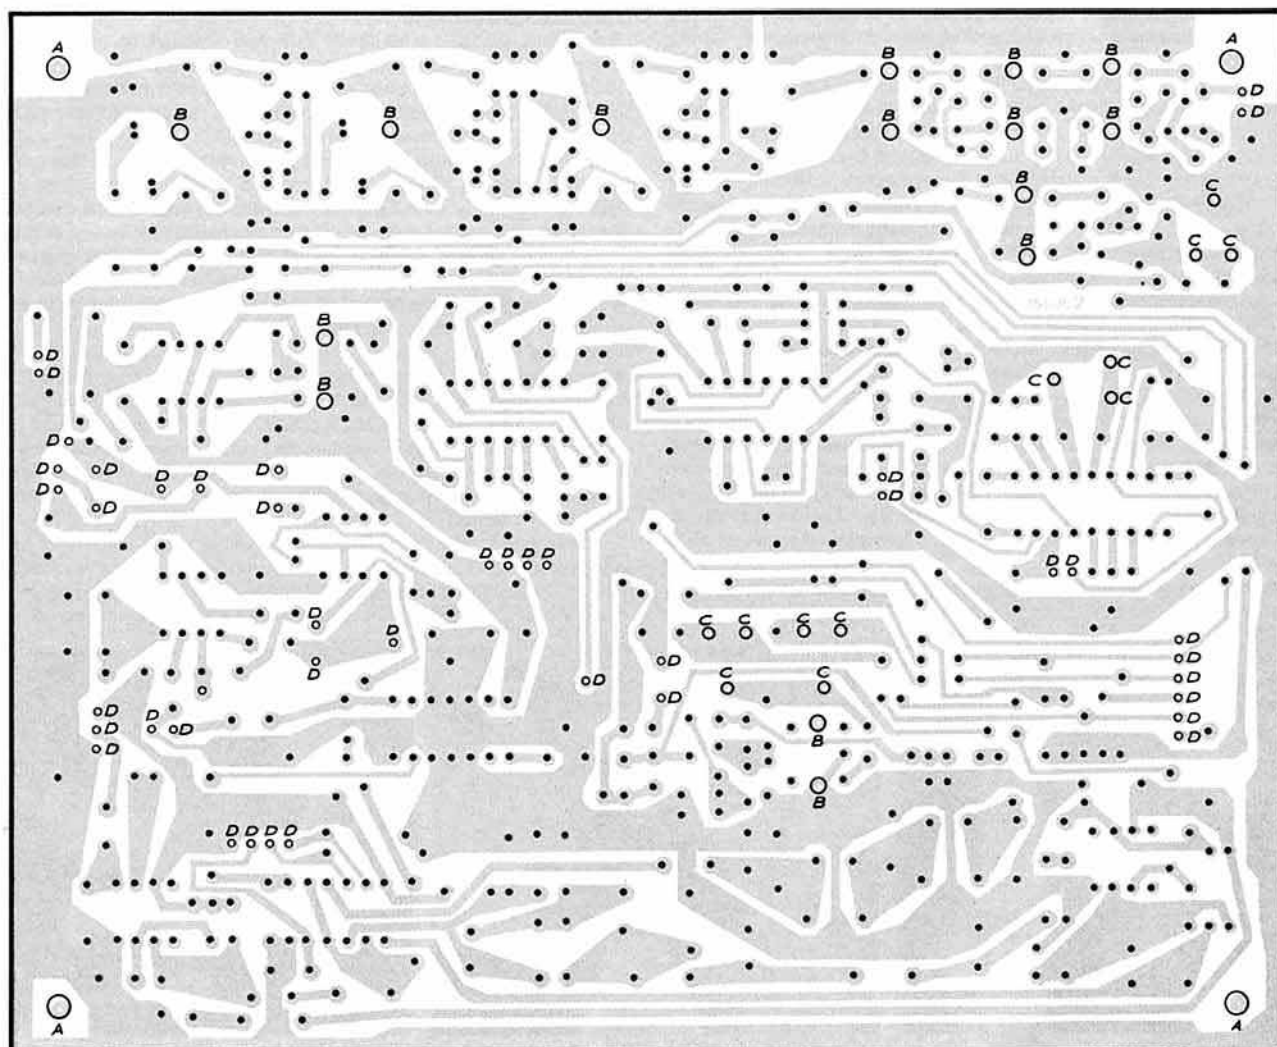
PCB drilling plan. Holes shown ● are 0.85mm diameter. Four holes "A" are 3mm diameter. 15 holes "B" are 1.6mm diameter. 12 holes "C" are 1.3mm diameter. 43mm holes "D" are 1mm diameter
